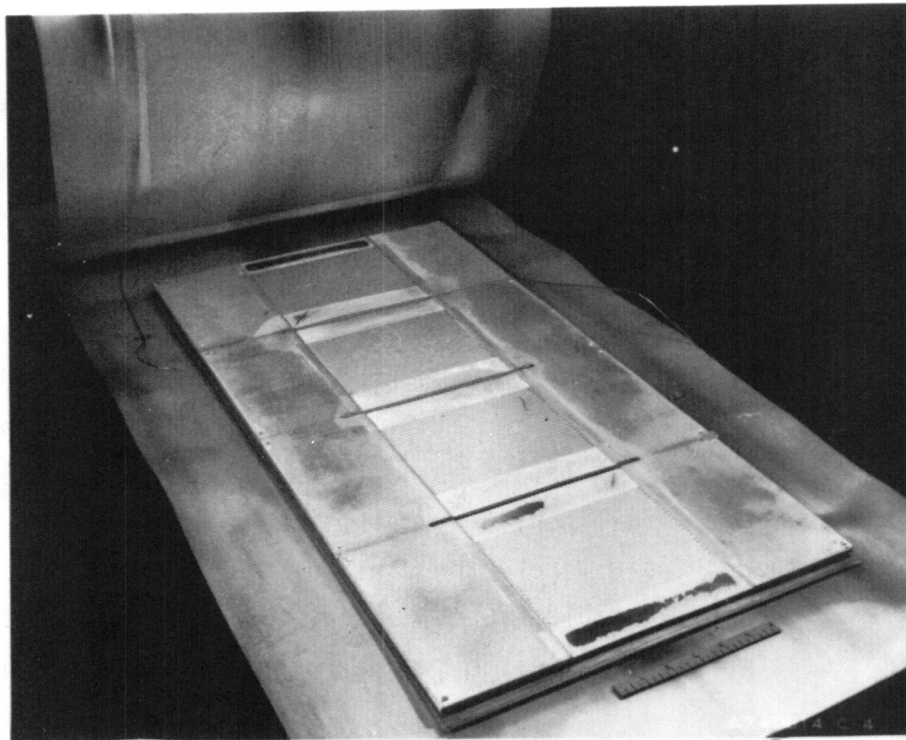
SSTS—Four Simultaneously Brazed Panels Being Removed from Retort
